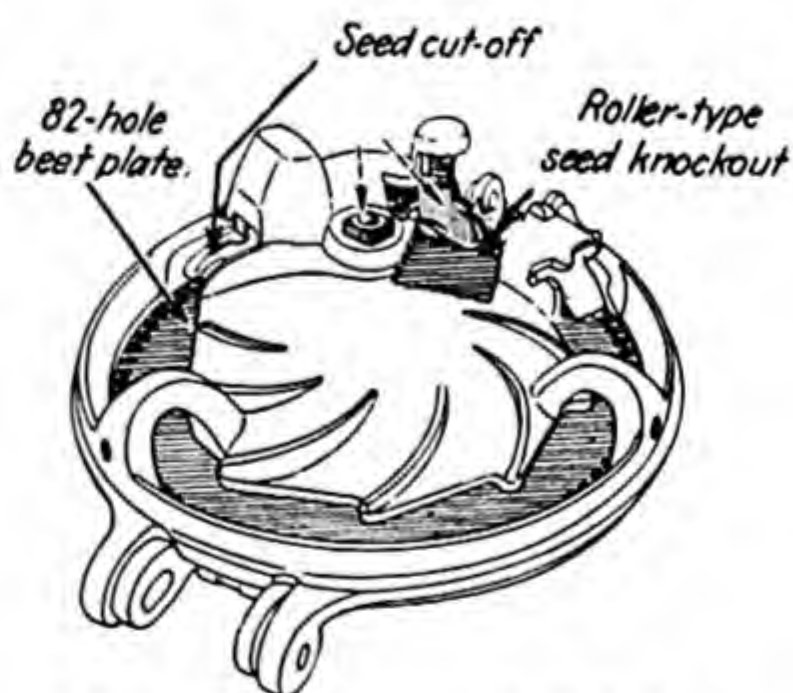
Segmented 82-hole beet plate with spurlike roller seed knock-out. Part of the cover is cut away to show knock-out.
